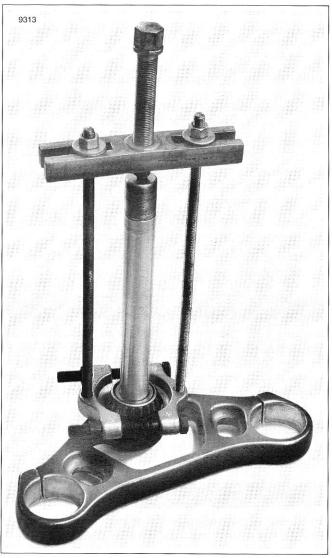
Bearing Puller Based on Universal Wedge Attachment
